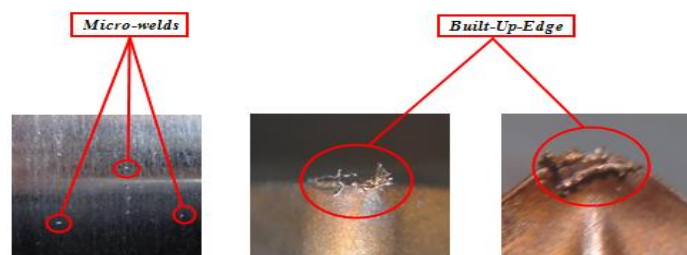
Micro-Weld on machined surface and Built-Up Edge on cutting insert
